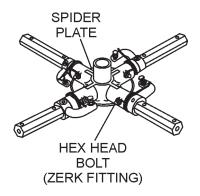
Removing Roll Pin and Zerk Grease Fitting
